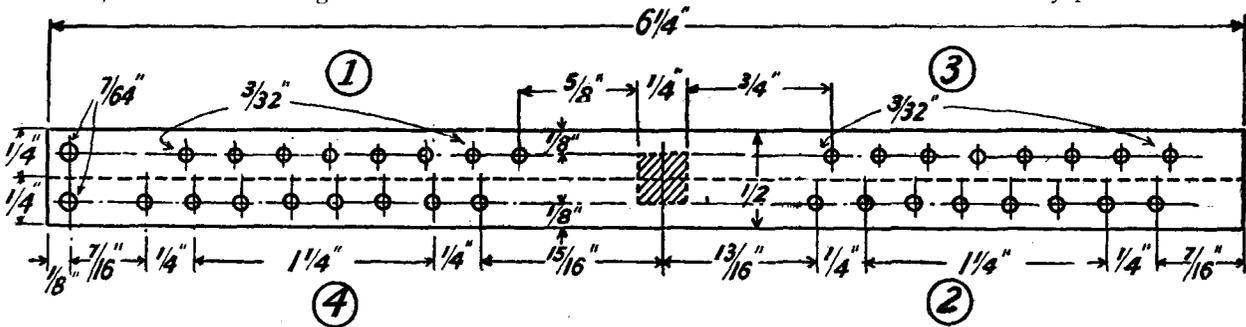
This drawing, being to full scale, may be used as a template for marking out the X-shaped former for the grid coil.
